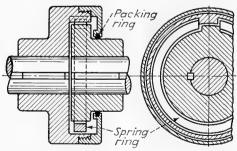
This T. L. Smith Company type of coupling has a flexible metal ring engaging projections integral with the outer and inner hubs. A packing ring protects the interior from dirt, yet compensates for angular misalignment. The coupling can drive in either direction.
